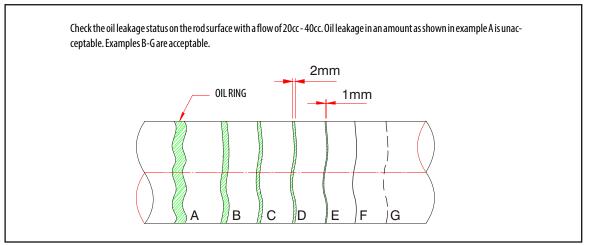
Acceptable Oil Leakage on Cylinder Rod
